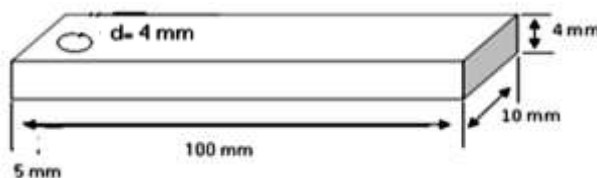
The Shape of Fatigue Specimen Figure 4 Fatigue Test Device.
